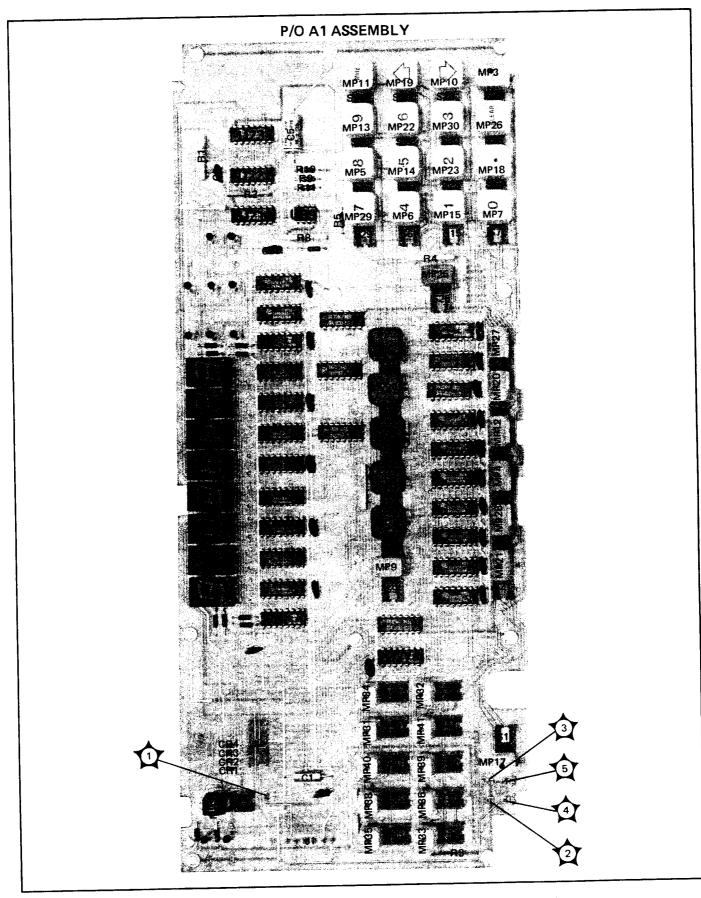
P/O A1 Keyboard and Display Assembly Component Locations (Keyboard Circuits)
